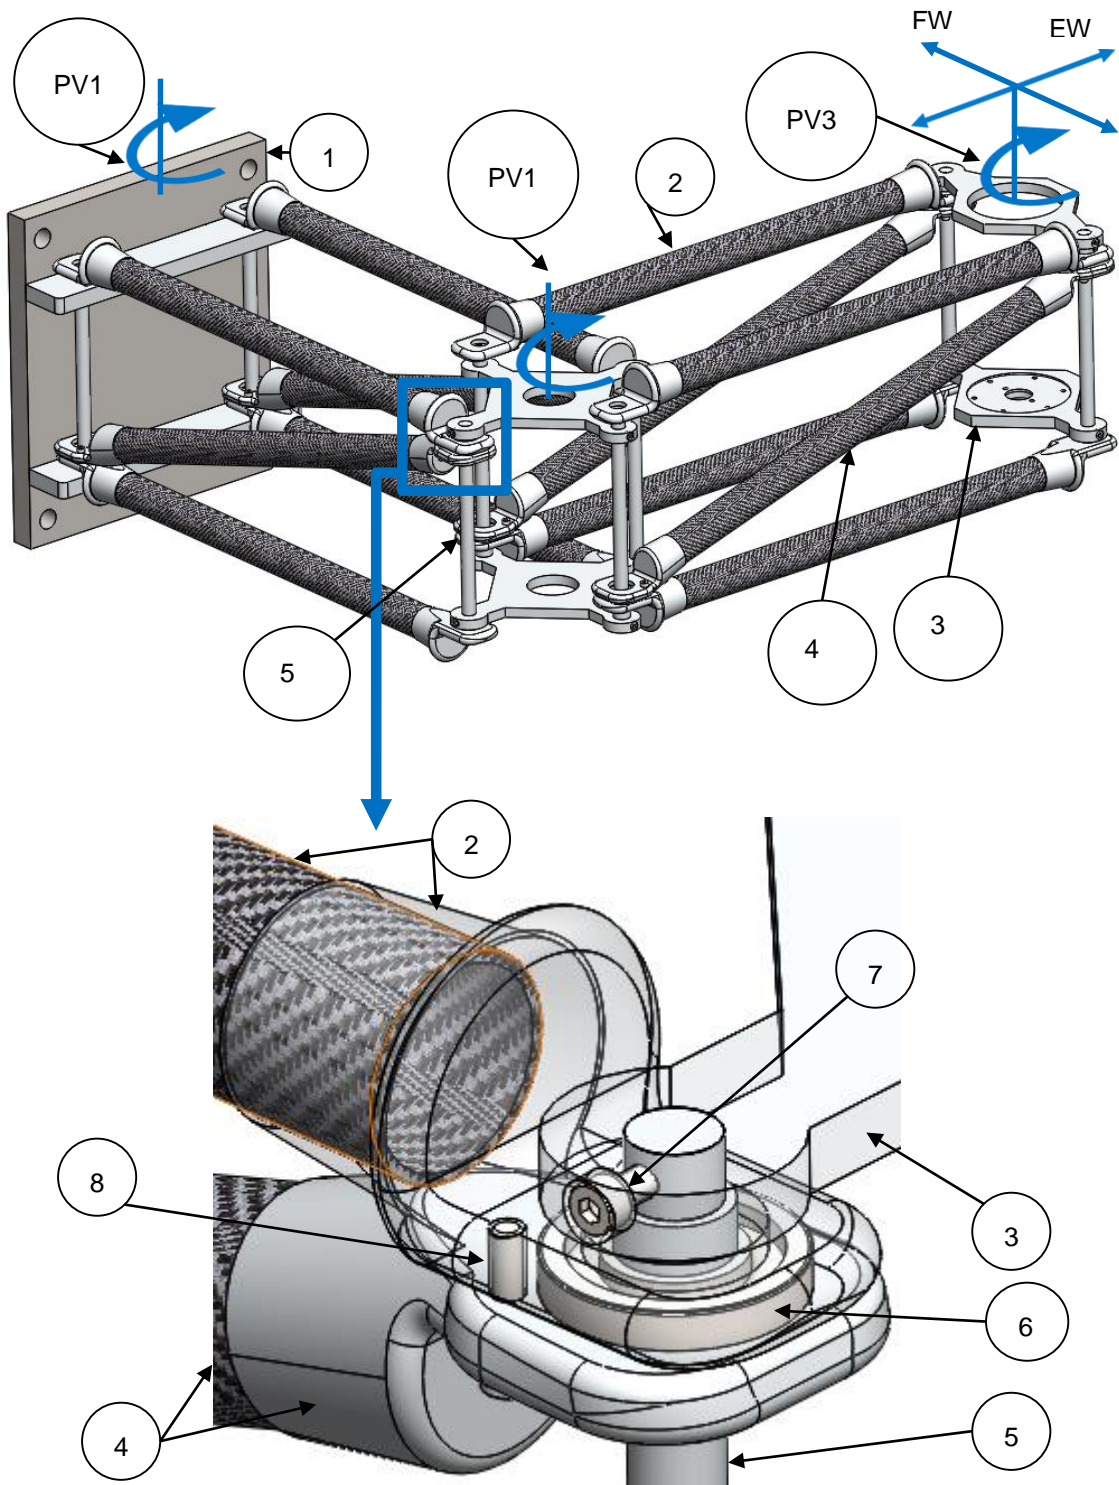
Frame for the mount system and one of its Pivot joints detail view. 2. Carbon fibre rod and its aluminium fixture, 3. Aluminium plate, 4. Carbon fibre stiffener and its aluminium fixture, 5. Shaft, 6. SKF ball bearing, 7 & 8. Hexagonal socket head screws.
